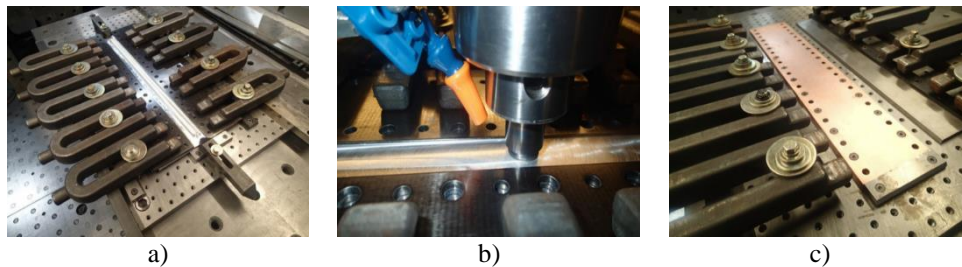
FSW welding process setup, a) Clamping condition, b) Force air cooling, and c) Copper anvil
